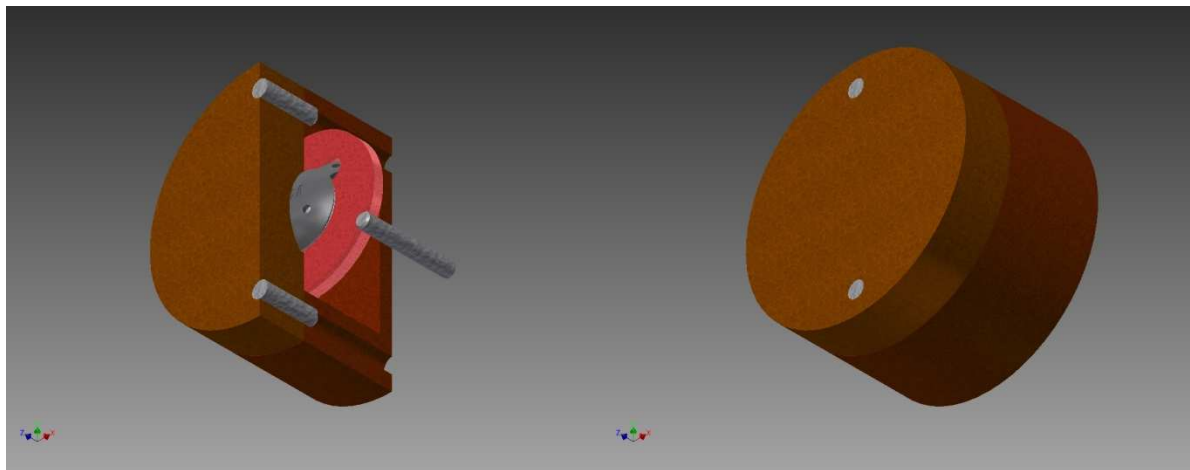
Drawing of the assembled “eye” phantom with a ^{106}Ru eye plaque.
